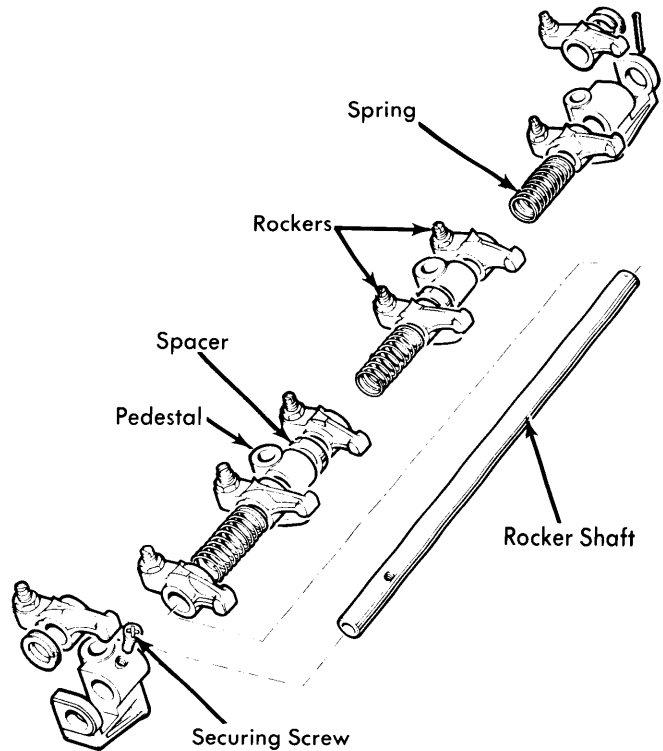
Disassembled View Of Rocker Arm & Shaft
